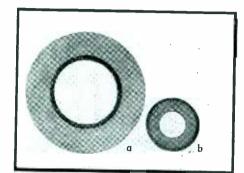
Cross section of surface hardened steel tubes; tube (a) has been heated inwardly by inserting the coil into the tube; in tube (b) the external surface has been hardened by insering tube in coil.
